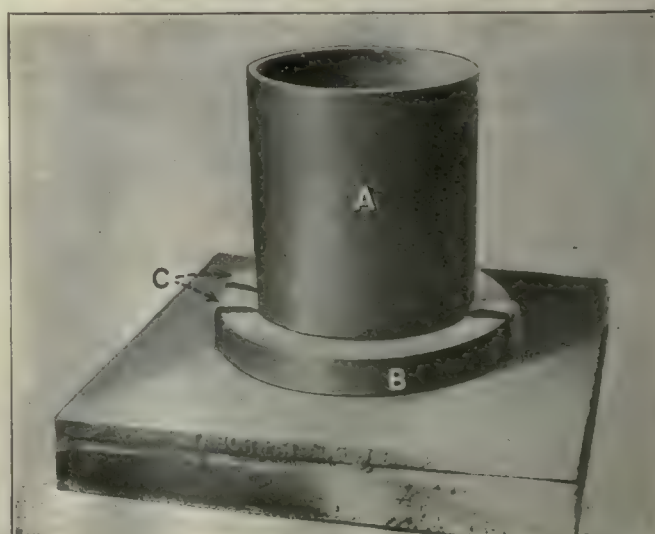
PATTERN ON THE JOLTING MACHINE, SAND POCKET DOWN
